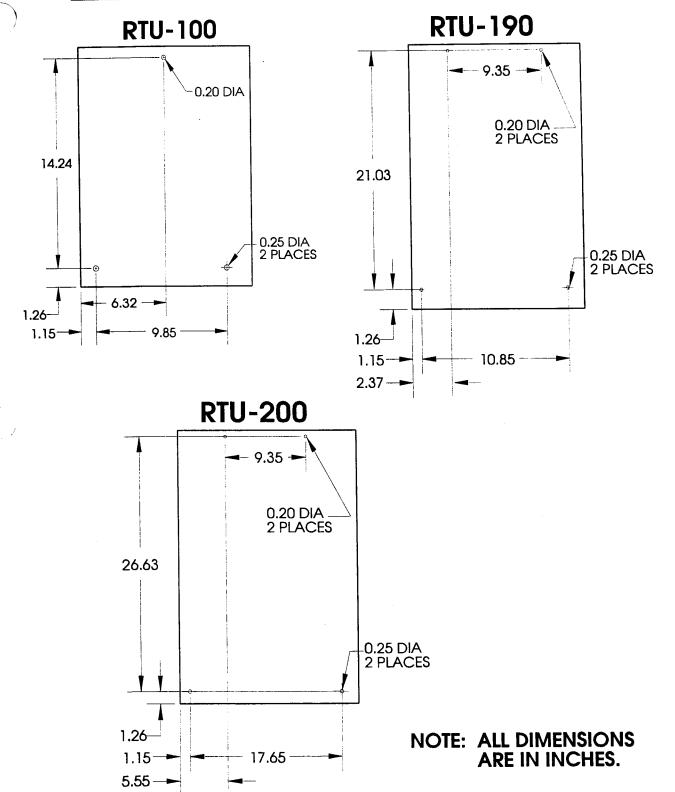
RTU ENCLOSURE MOUNTING HOLE MEASUREMENTS
